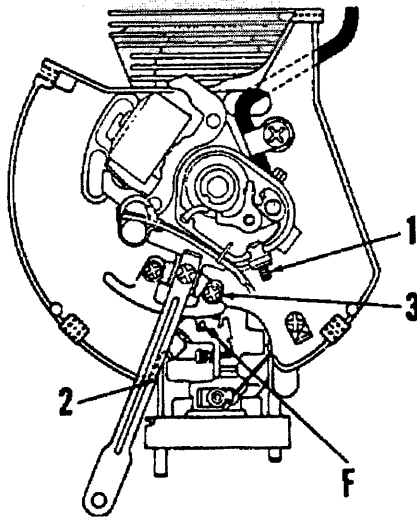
View showing speed controls and points of adjustment for motors with pressed in fuel inlet type carburetors and breaker point magneto. Refer to text.
